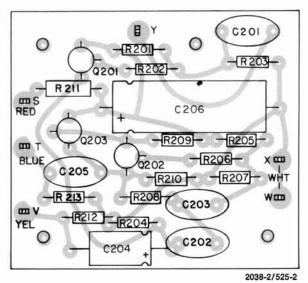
FILTER CIRCUIT BOARD PARTS LOCATION DIAGRAM
